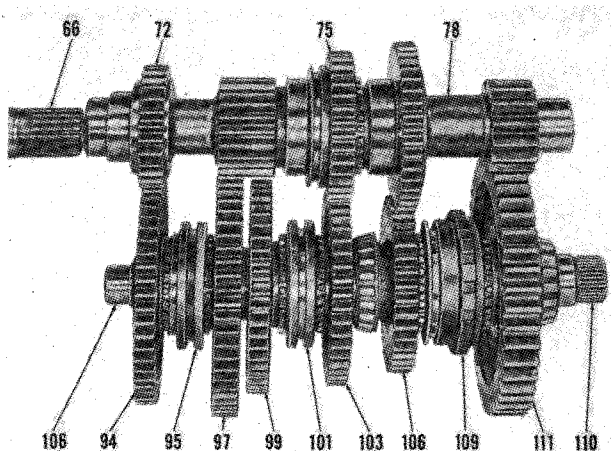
View showing all transmission gears except reverse idler. Refer also to exploded view in Fig. 160. Sliding coupling (109) incorporates dog teeth for transmission brake pawl. Front end of main countershaft (106) and top shafts and gears are supported in needle roller bearings.
